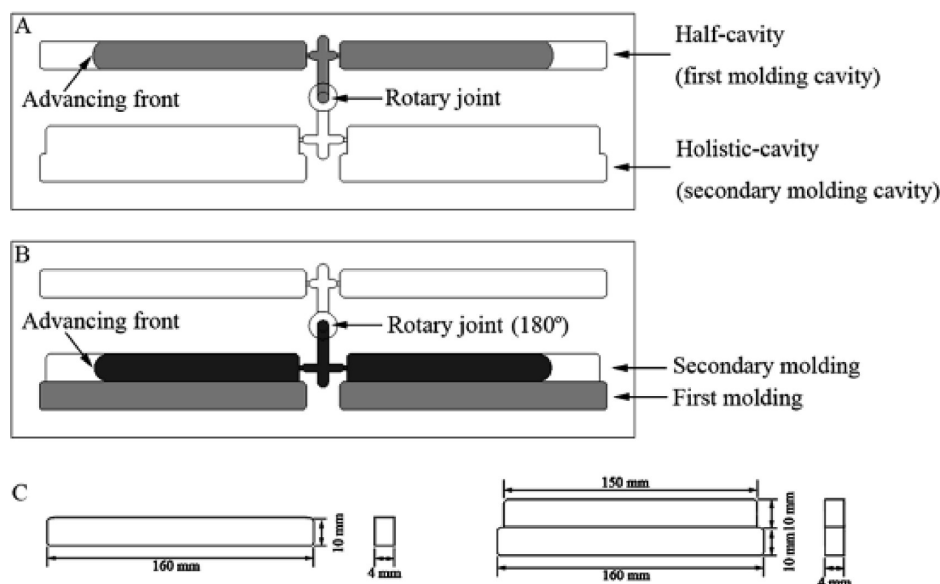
(A, B) Schematic representation of the IOM procedure in one mold and (C) the dimensions of the first molded part and the complete molded specimen.
